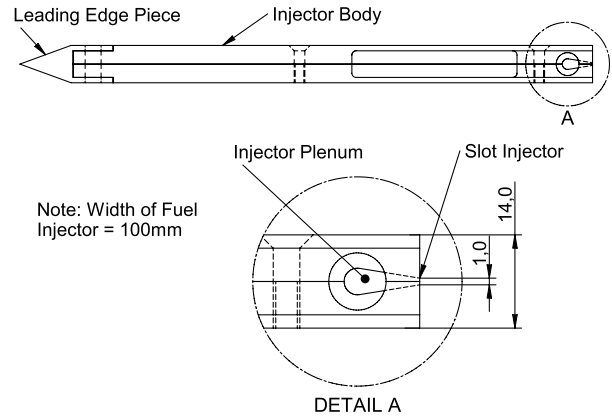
Detail view of fuel injector. Dimensions are in millimeters.
